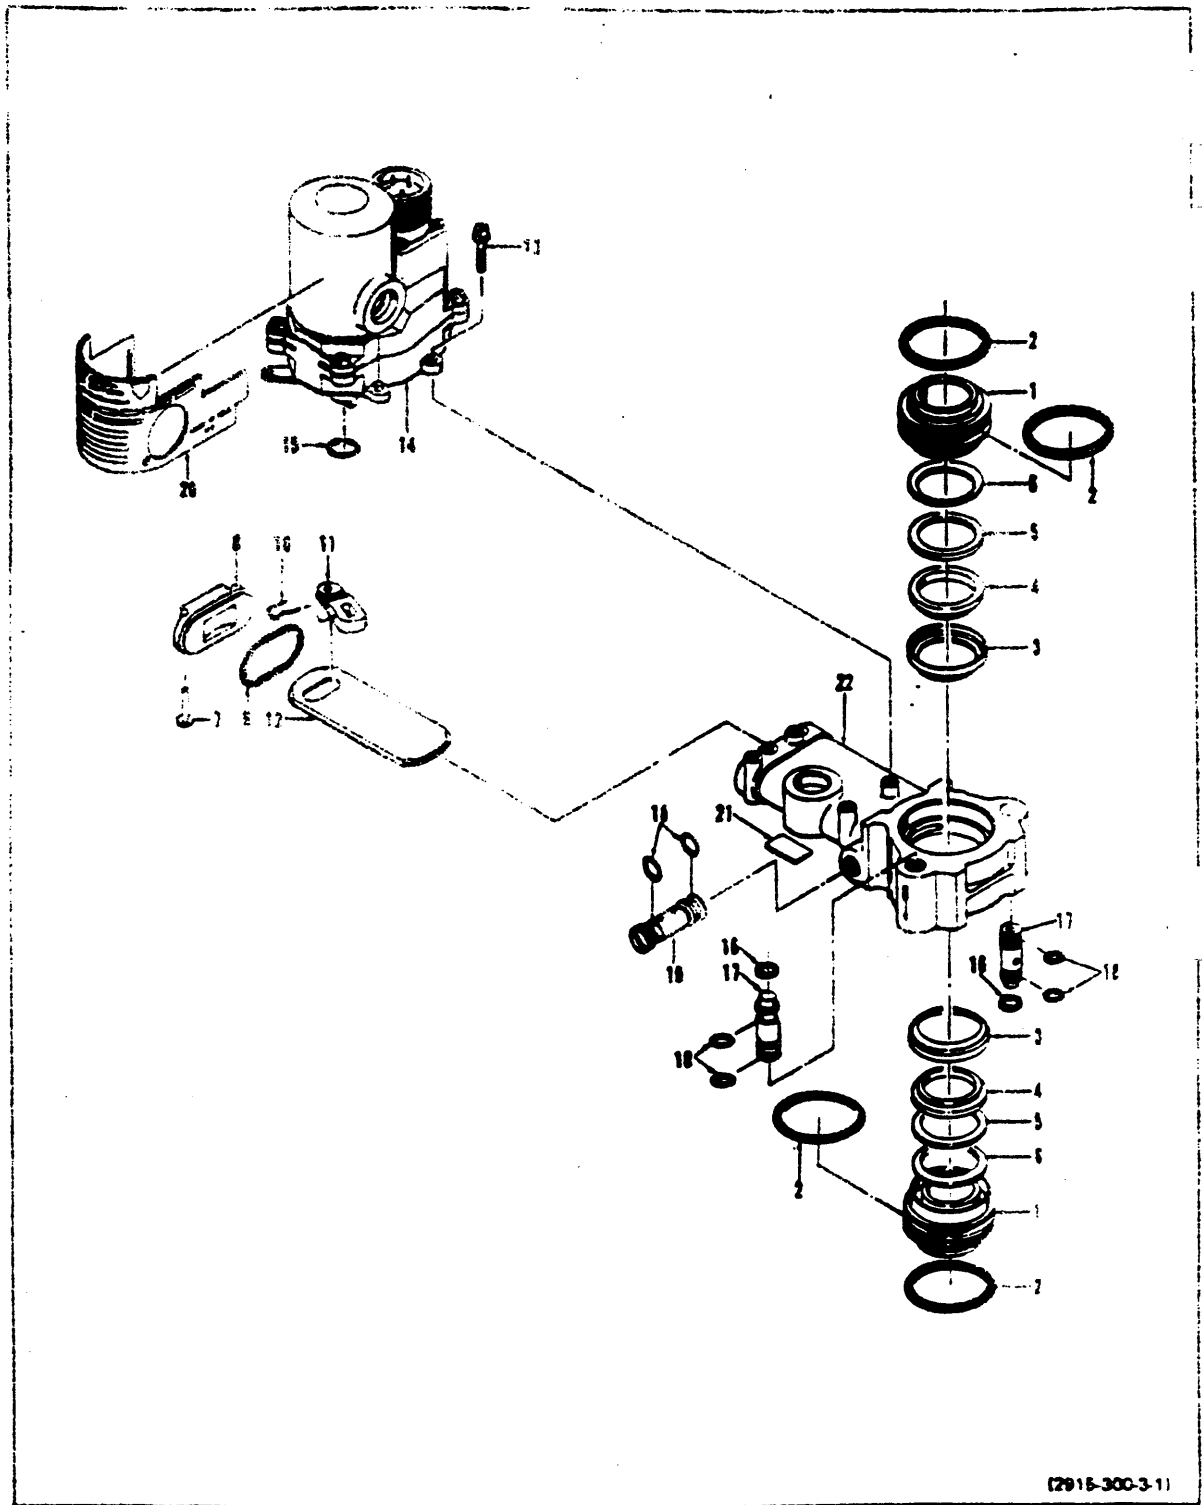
Gate Shutoff Valve Assembly, Part No. AV16B1294D and AV16B1296D
